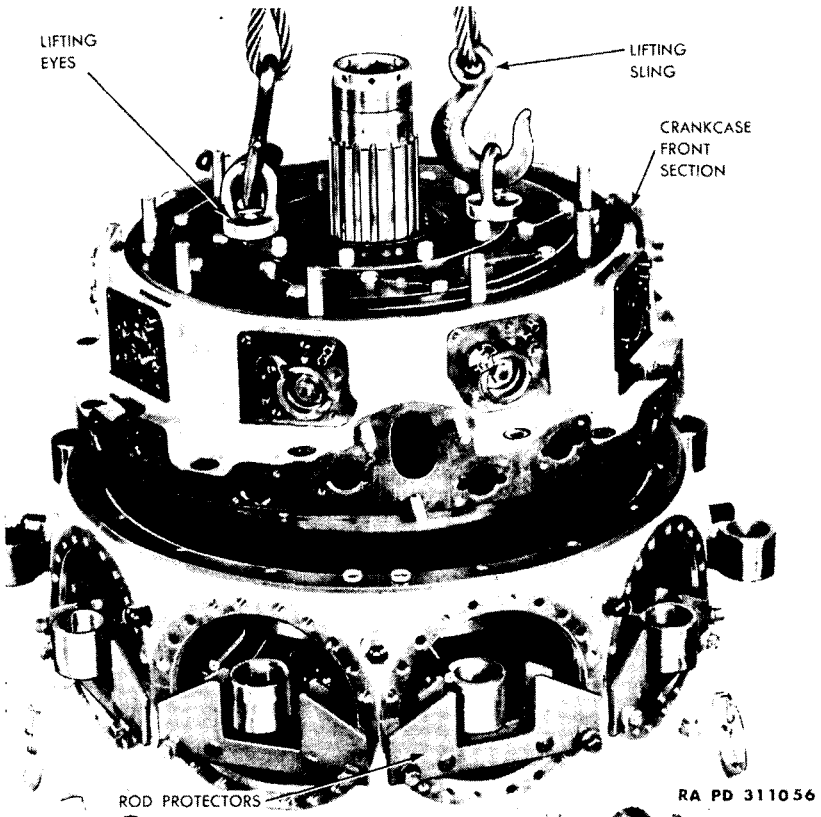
Removing Crankcase Front Section, Using Sling 5A2228, Eyes 5A2317, and Protector 5A2159
